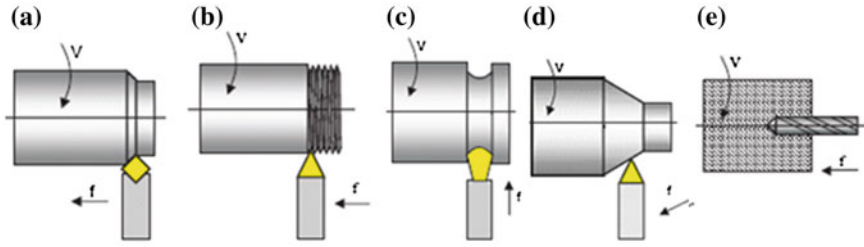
Types of turning operations. a Cylindrical. b Threading. c Toroidal. d Conical. e Axial holes
